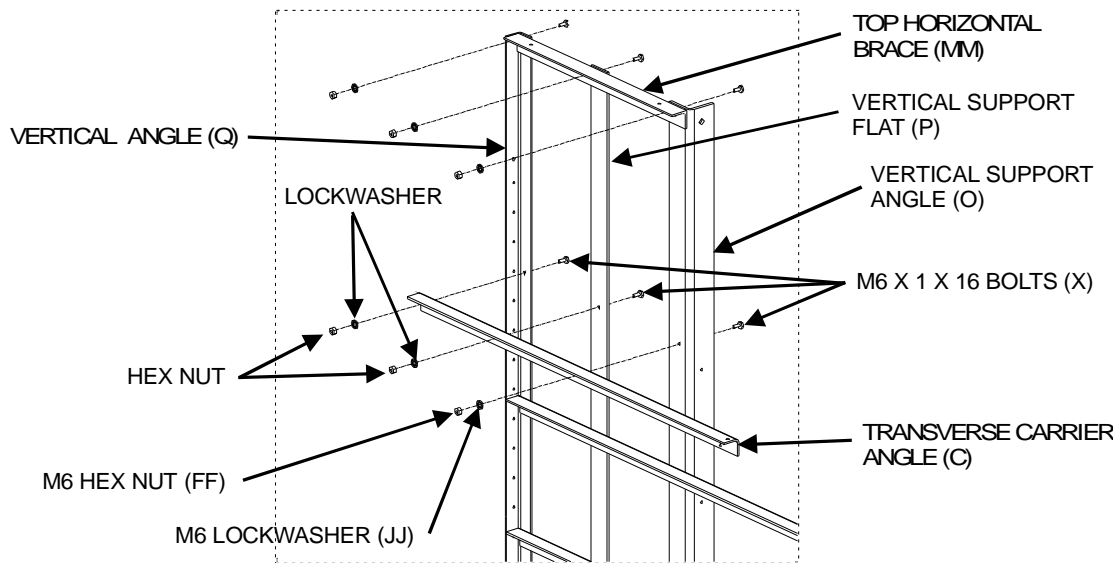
Assemble Transverse Carrier Angle to Vertical Assembly
